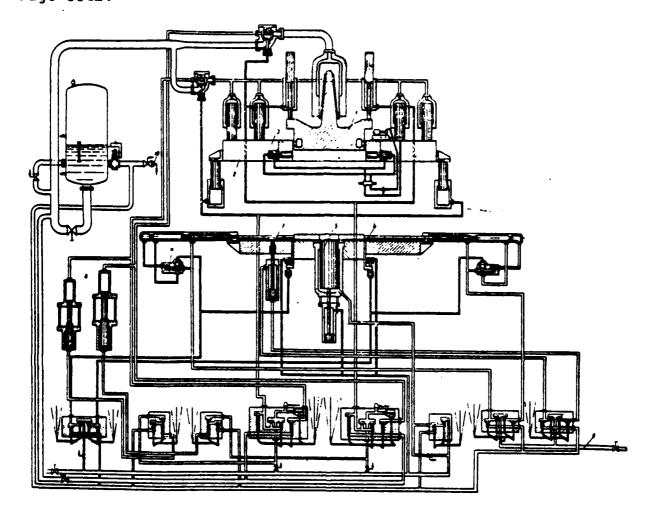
The hydraulic schematic of blanking double-action press by effort/force 3000 t: 1 - exhaust slider; 2 - pressing slider; 3 - device for pairing of the motion of exhaust and clamping sliders; 4 - valve device for braking of table; 5 - clamping fixture of table; 6 - central knockout; 7 - side knockout; 8 - multipliers; 9 - forcing line; 10 - drain line.
